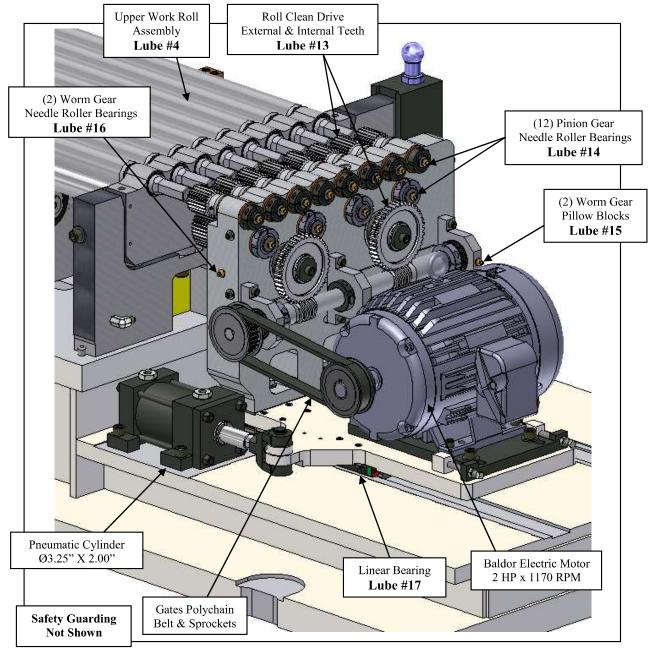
Upper Roll Clean Drive (Shown Disengaged)
